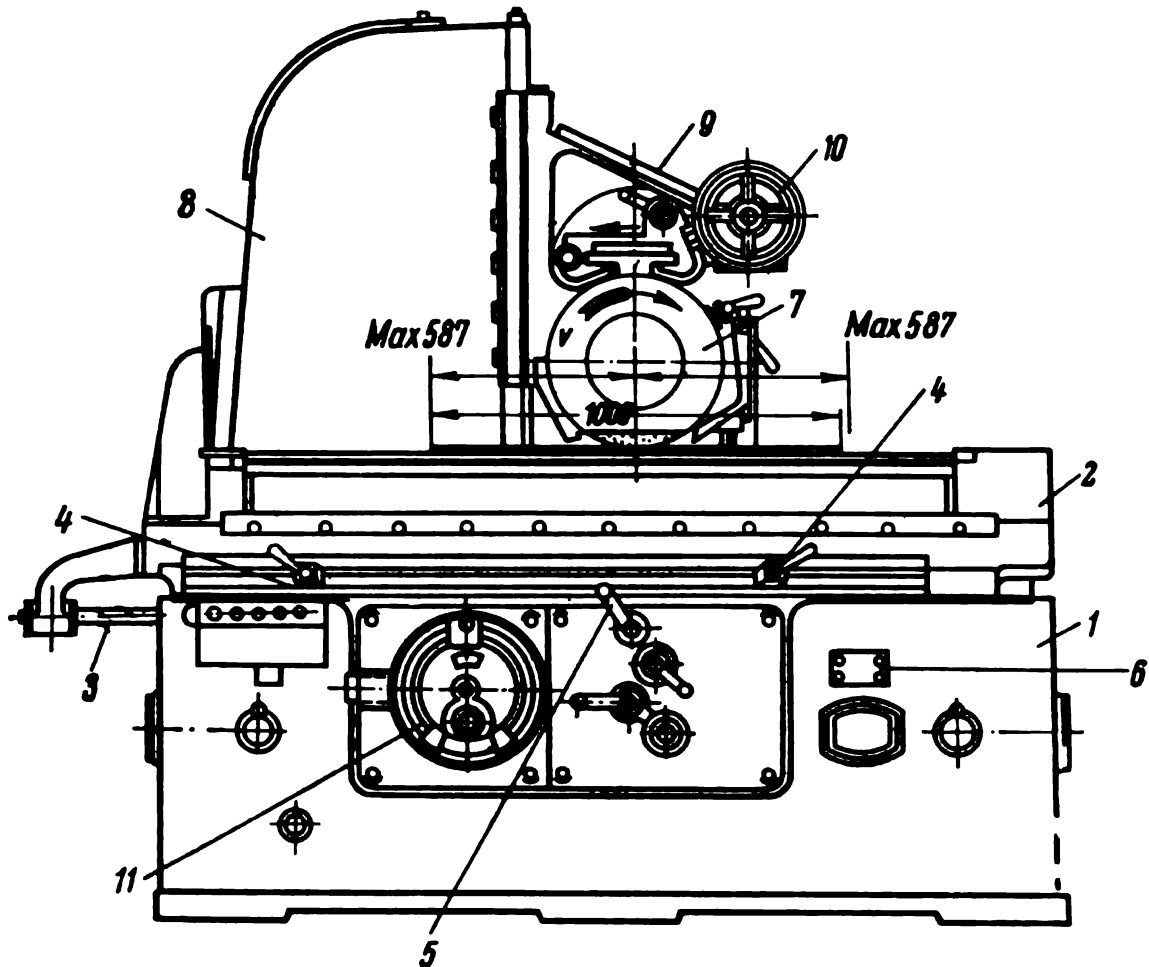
Horizontal-spindle reciprocating-table surface grinding machine
